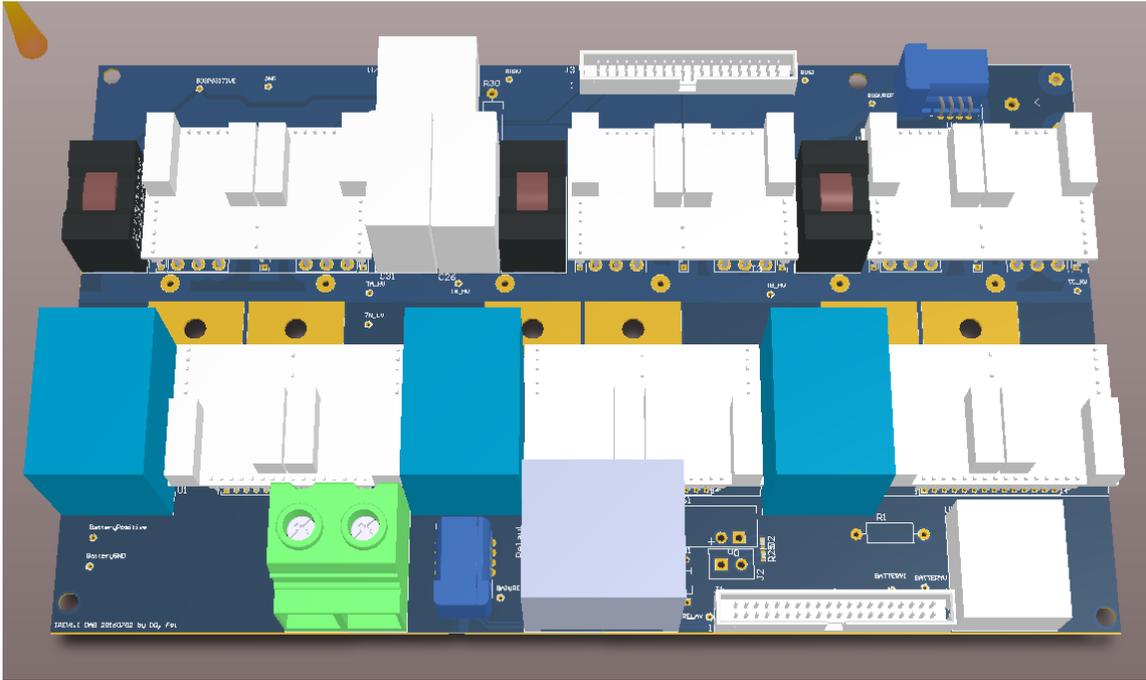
3D PCB model of the DAB part in Prototype 2.
